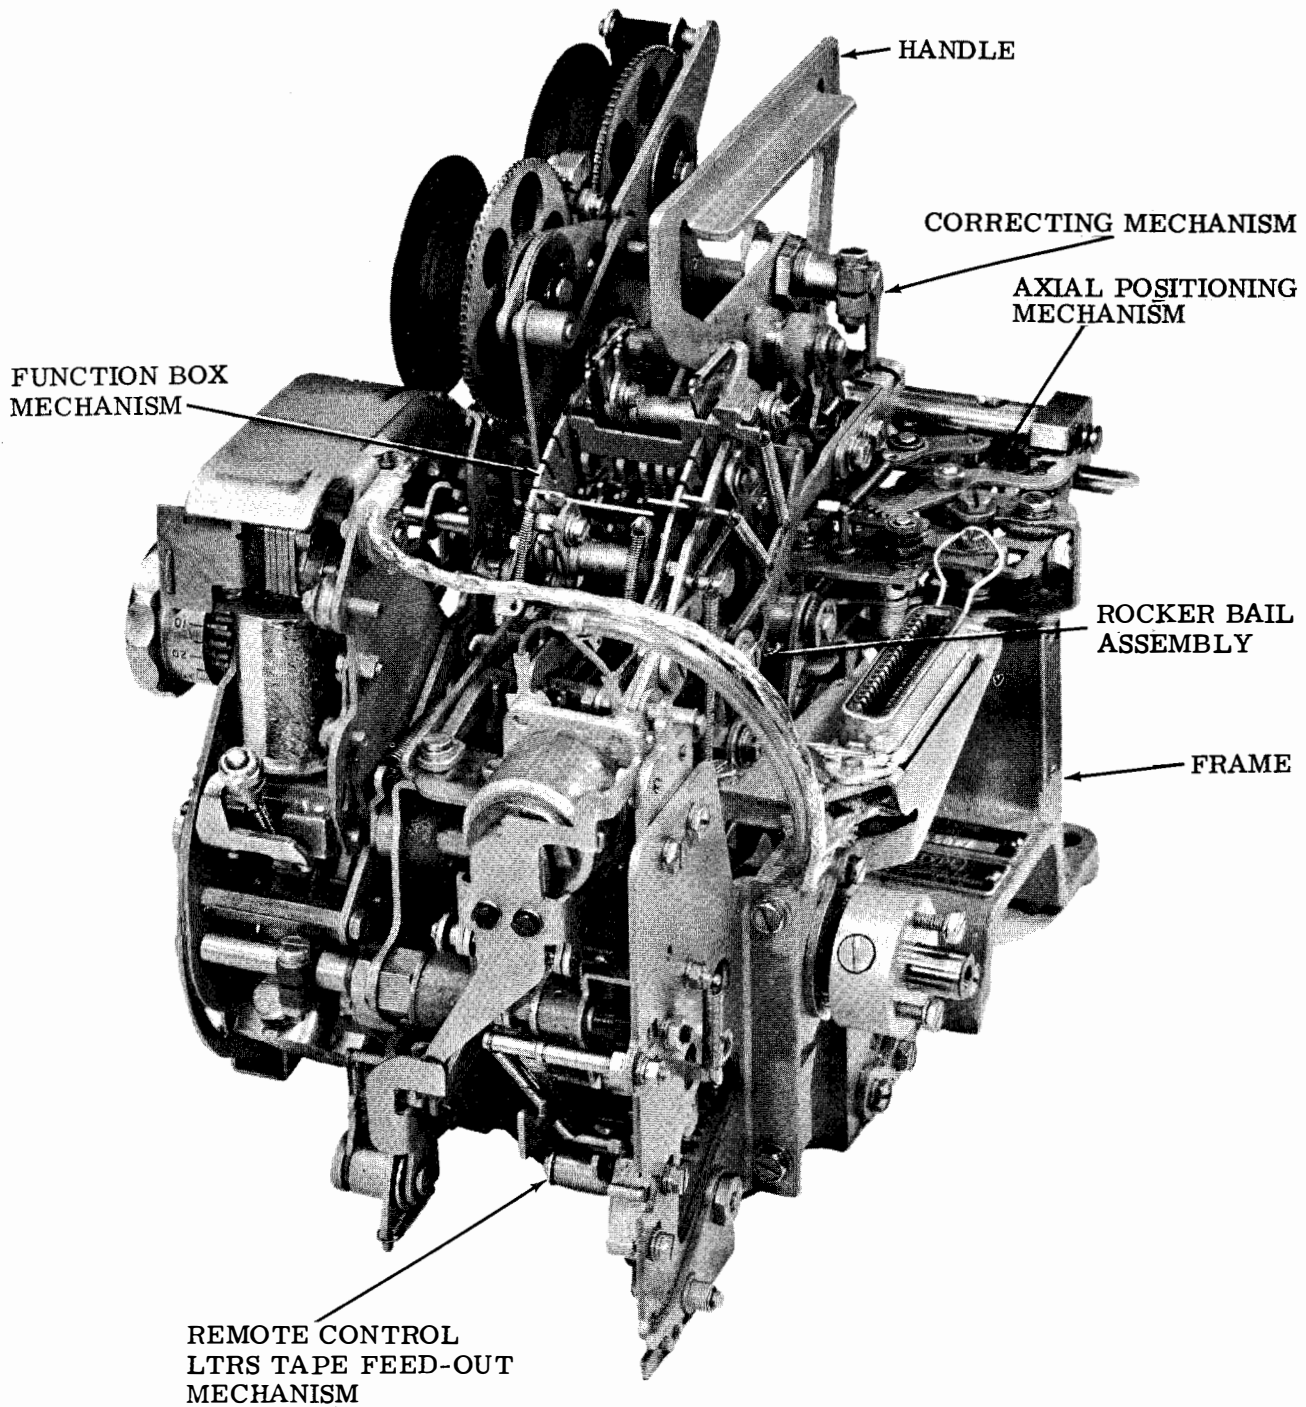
28 Typing Reperforator Unit With Remote Control LTRS Tape Feed-Out Mechanism (Rear View)
